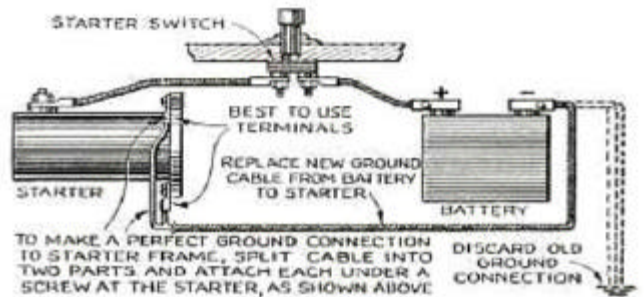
Starting old cars is speeded up if the ground cable is run to self-starter frame instead of car frame
